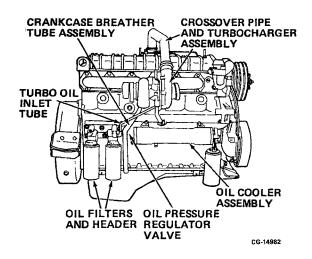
Component Removal Prior to Mounting the Engine on the Stand
